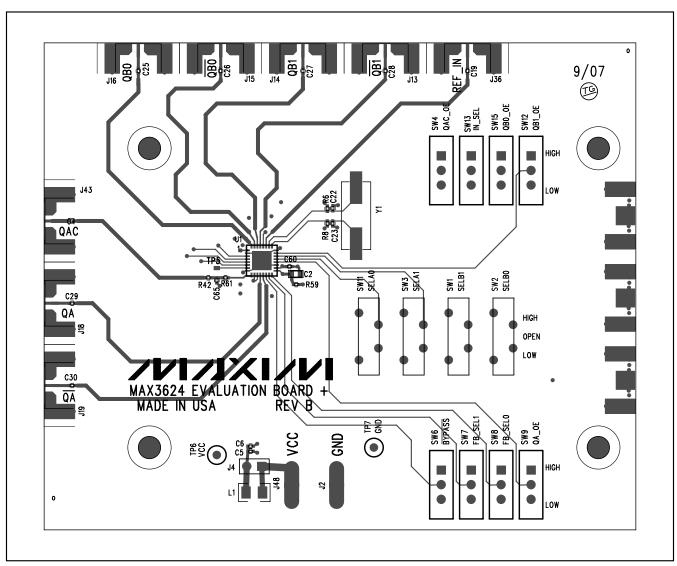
MAX3624 EV Kit Assembly Drawing—Top Side
